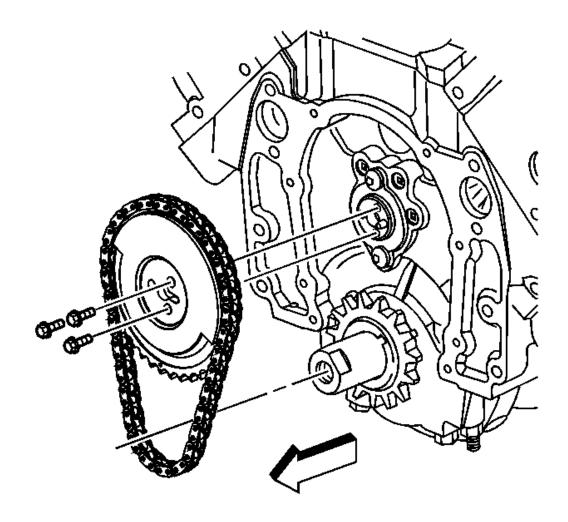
View Of Camshaft Sprocket, Timing Chain & Bolts Courtesy of GENERAL MOTORS CORP.
